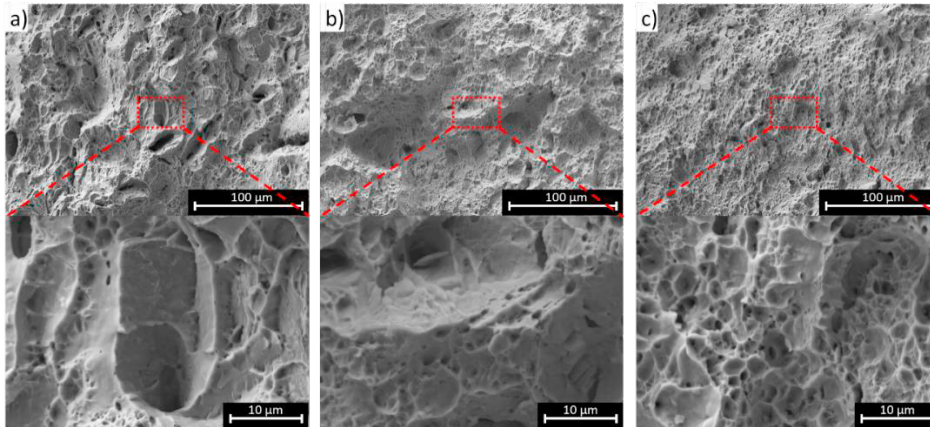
Fracture surfaces of B27 sample at positions: a) 25 mm; b) 60 mm; c) 85 mm.
